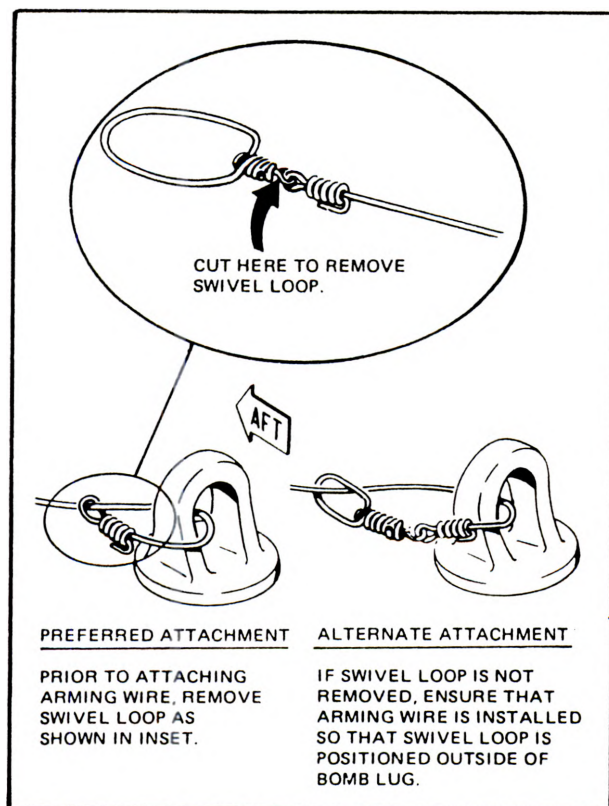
Attachment of Mk 3 arming wire to the aft bomb lug.
